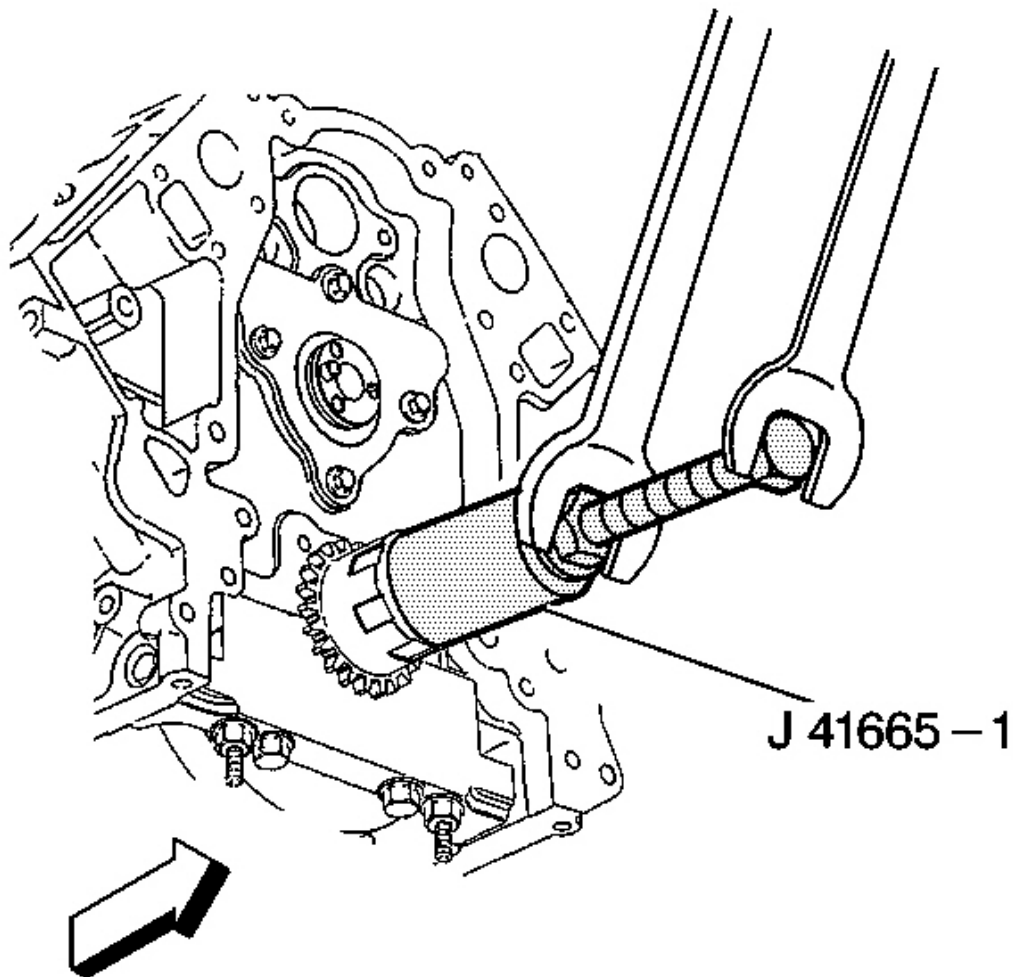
Installing Crankshaft Sprocket Using J 41665
